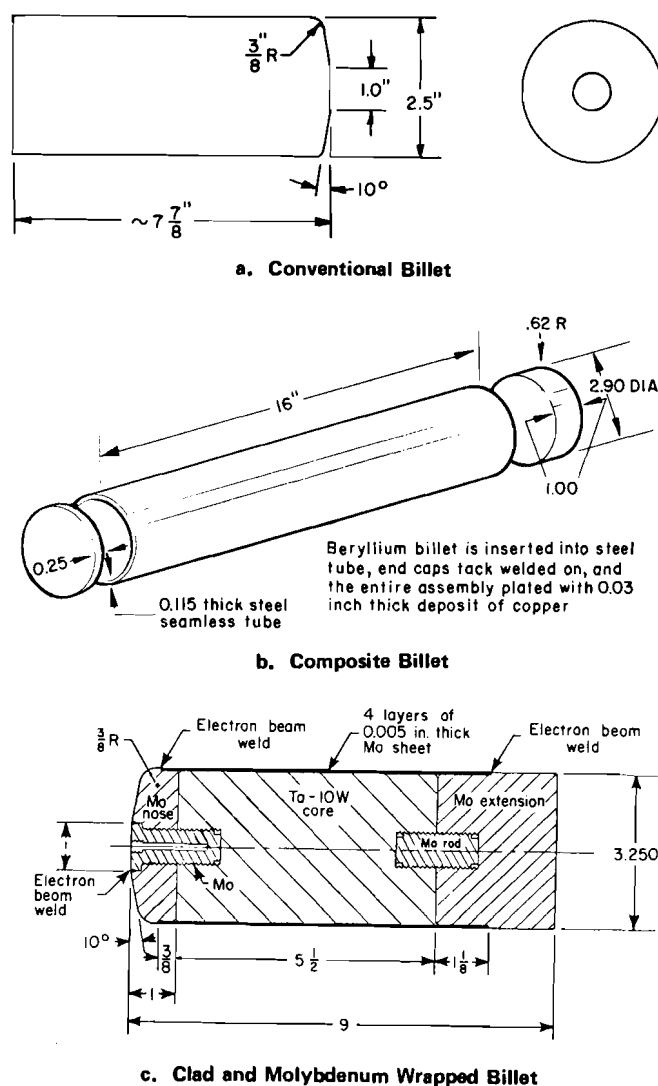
EXAMPLES OF BILLET DESIGN USED IN HOT EXTRUSION OF HIGH-TEMPERATURE MATERIALS
